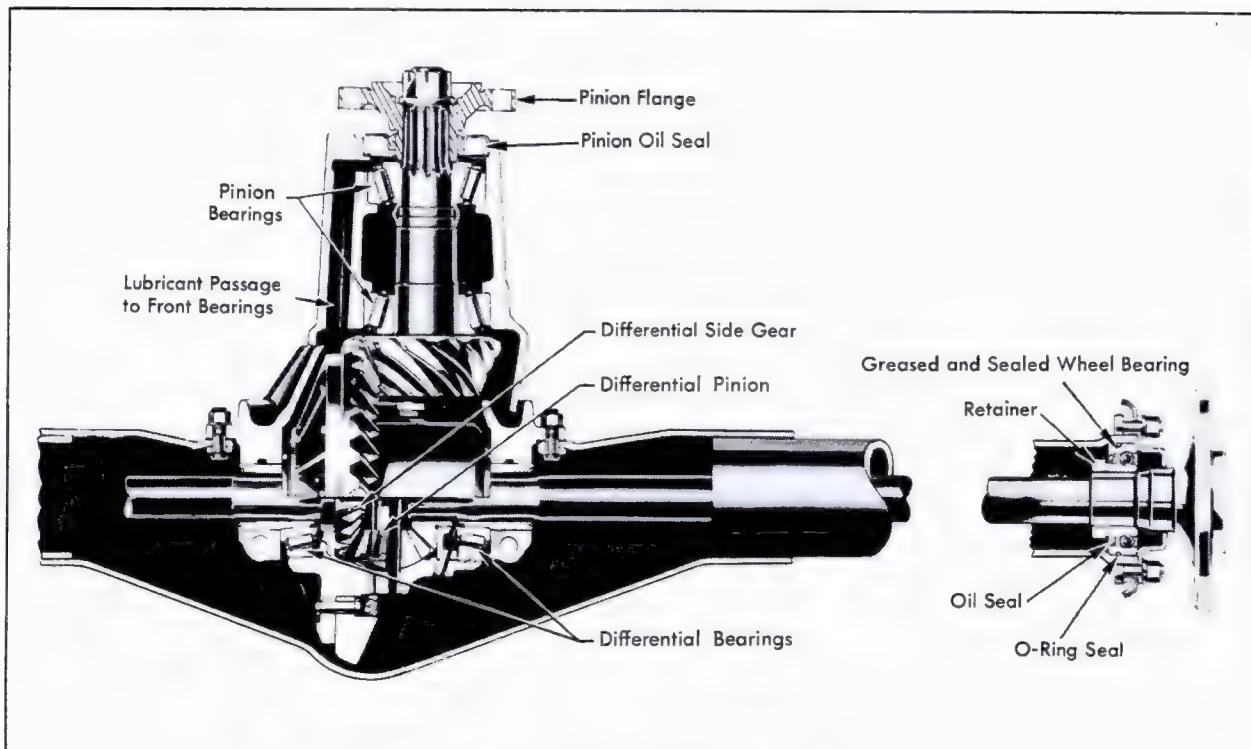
Differential Carrier and Rear Axle Assembly
